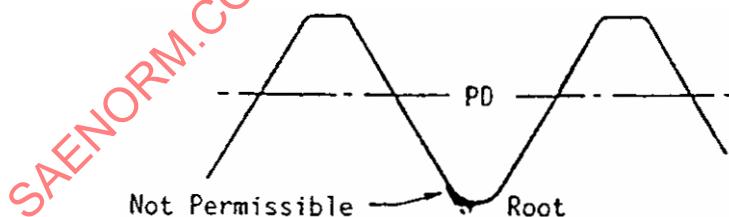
ROOT DEFECTS, ROLLED THREAD
